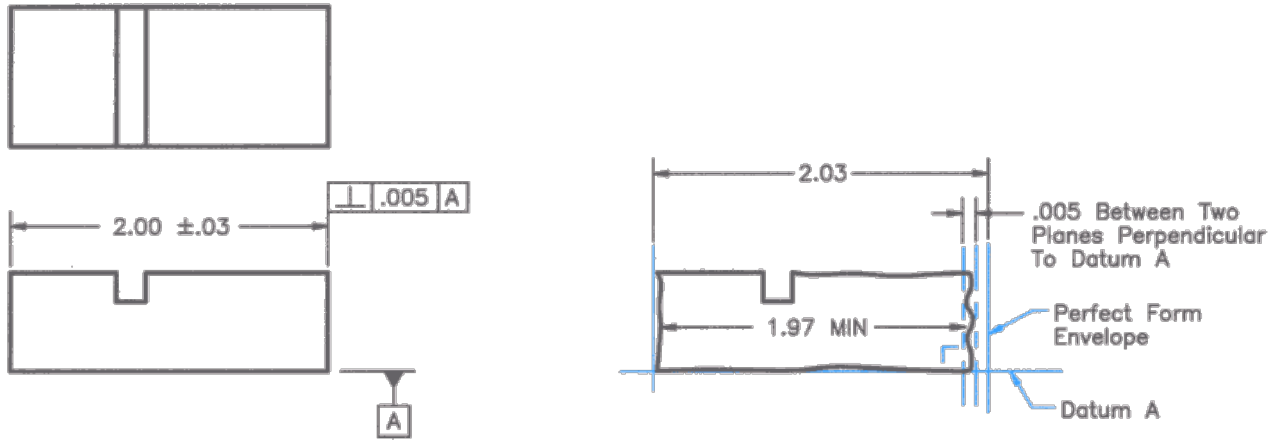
The tolerance zone for a perpendicularity tolerance on a flat surface is bounded by two planes.
